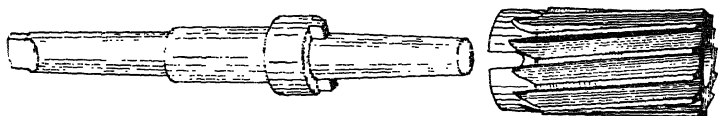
Shell-reamer arbor and shell reamer with spiral teeth.
